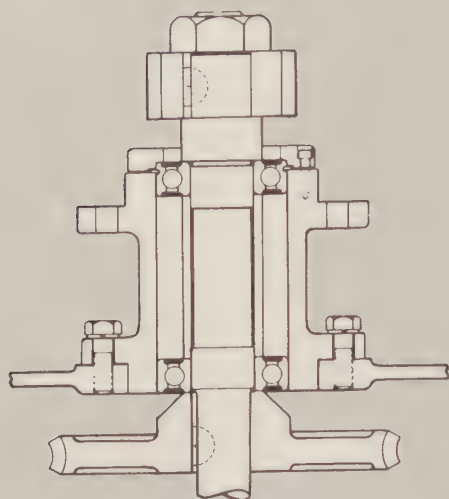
This vertically mounted textile loom mechanism utilizes two single row, sealed ball bearings. Machining is simplified because the housing can be bored straight through and faced on one end. No separate seals or locating shoulders are needed, since a snap-ring type integral seal bearing is used. Since, in general, single row sealed bearings have a thrust capacity equal to their radial capacity rating, no supplementary devices are required to accommodate the thrust loads encountered in this application.
